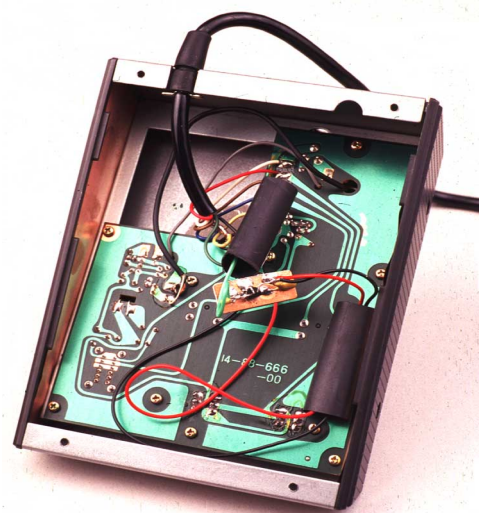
This is another way of assembling the components, using a scrap piece of PC board. The board is slipped into a piece of heat-shrink tubing and taped to the inside wall of the case. Another length of heat-shrink tubing covers the joined battery snap connectors.
